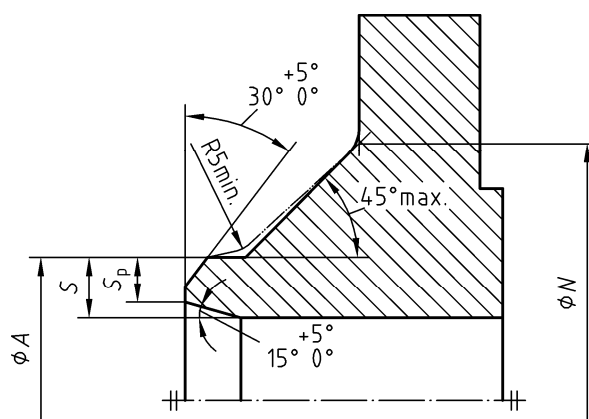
Welding end connection for wall thickness  $S \geq 22$  mm
